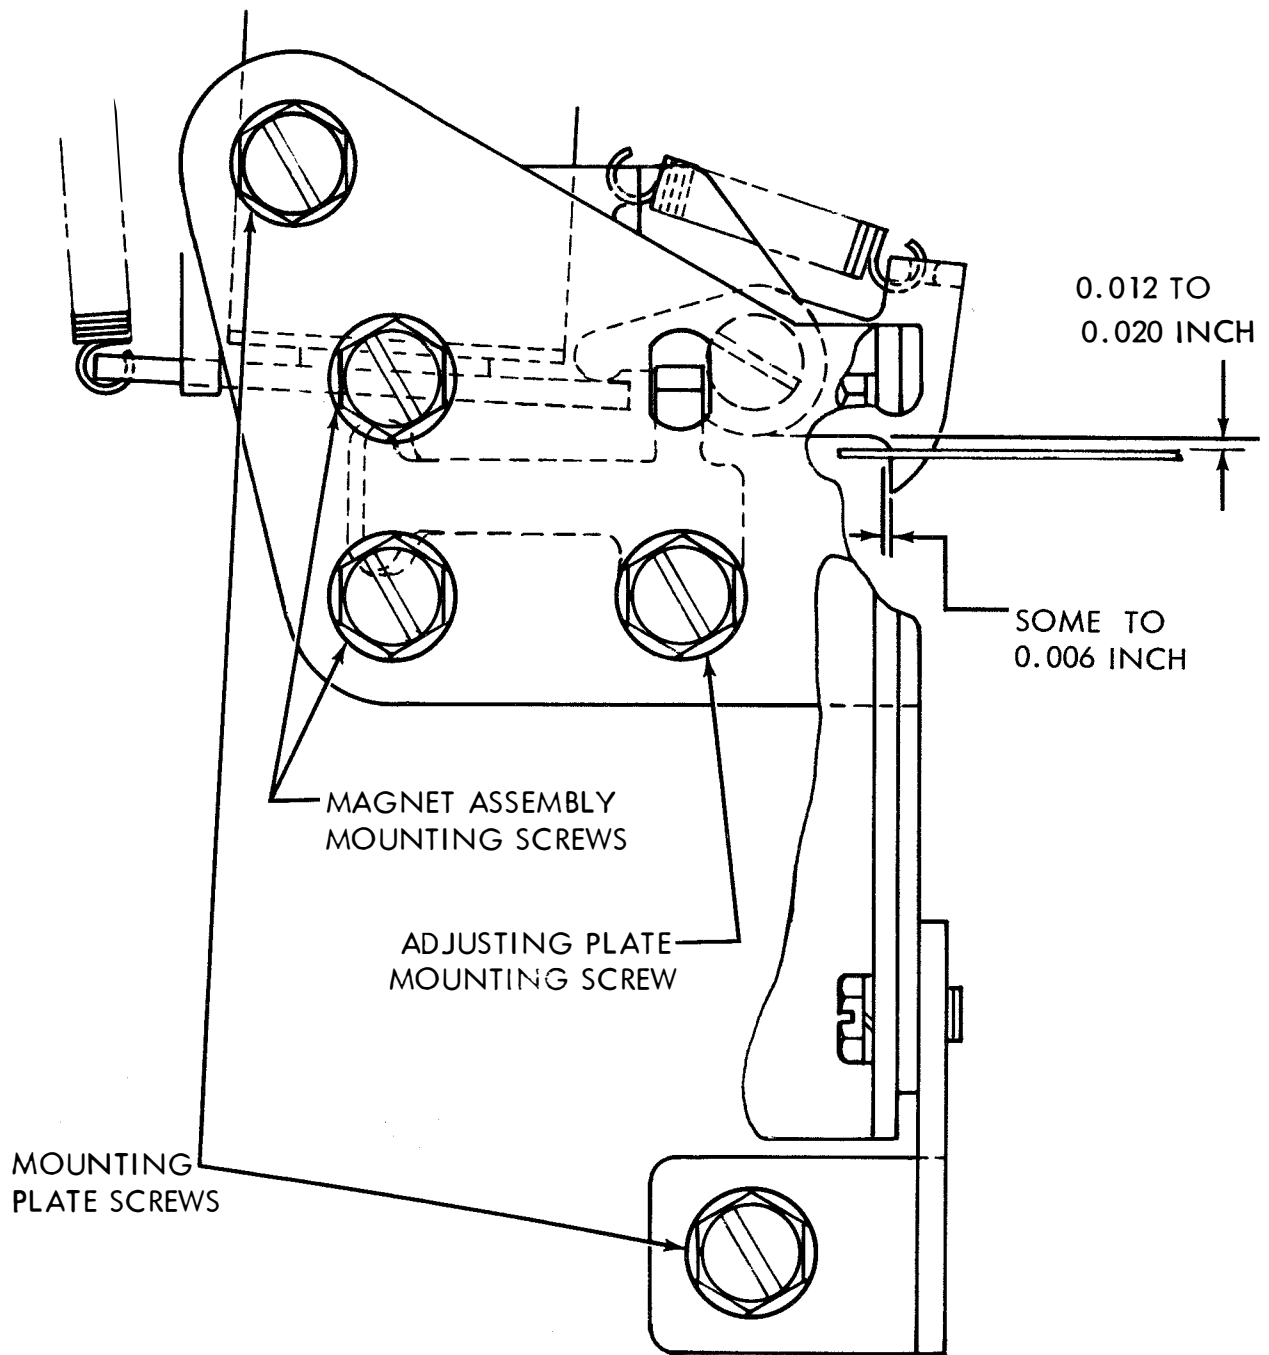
Latch Pawl and Adjusting Plate Clearances
